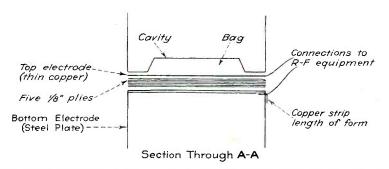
Sketch of the arrangement used to obtain "flexible" pressure on one side of the laminated assembly. A rubber bag which occupies a cavity in the upper form is inflated to 75 psi after the clamps are applied. Using a thin copper sheet for the upper electrode gives an approximation of "fluid" pressure
